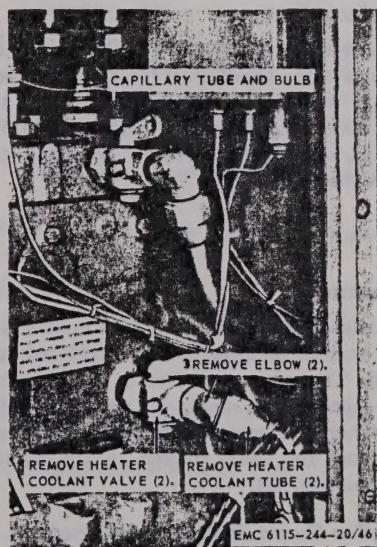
Heater coolant valves, heater coolant tubes, and water temperature gage capillary tube and thermometer, removal and installation.
